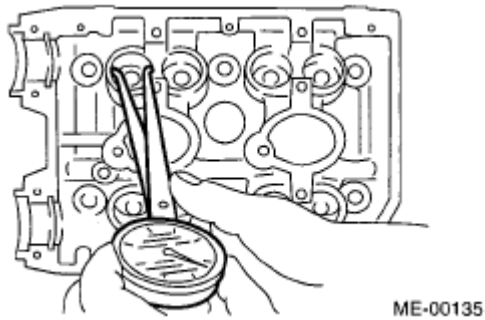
Measuring Inner Diameter Of Valve Lifter Mating Surface On Cylinder Head
